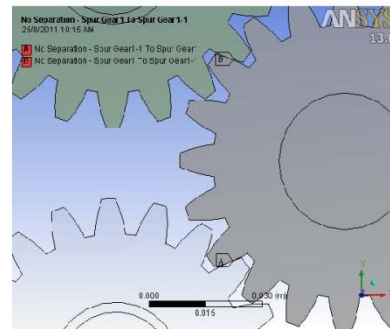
Detailed side view of the single pair tooth contact between two gears.
